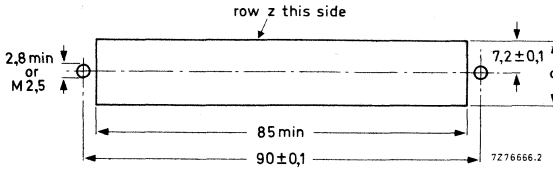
Panel cut-out; see Table 5 for dimension a.
